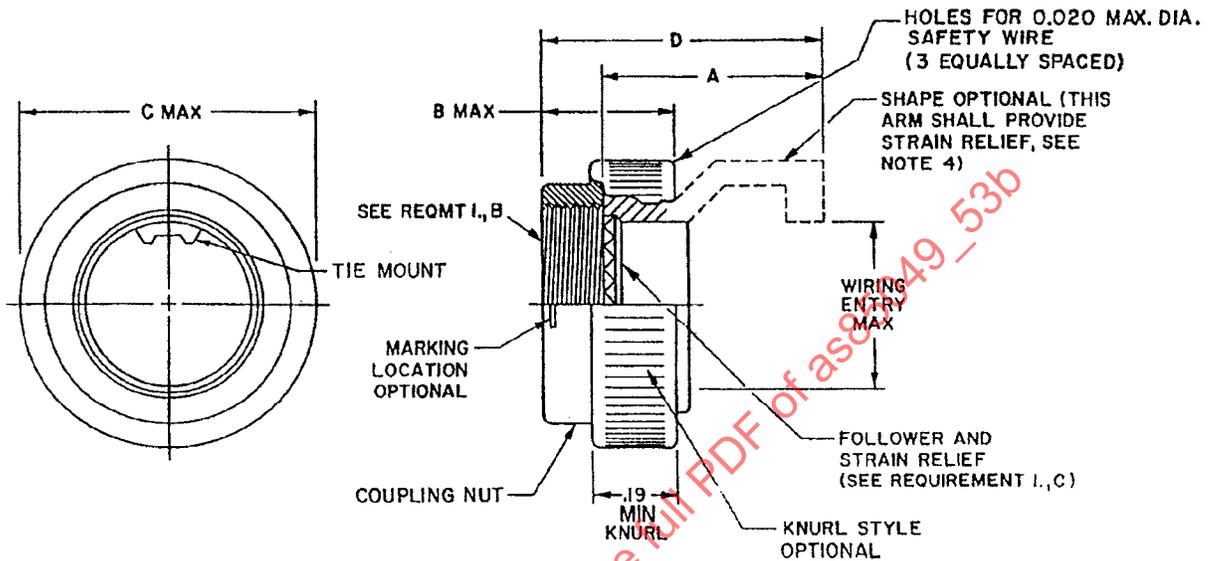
CONFIGURATION AND DIMENSIONS
